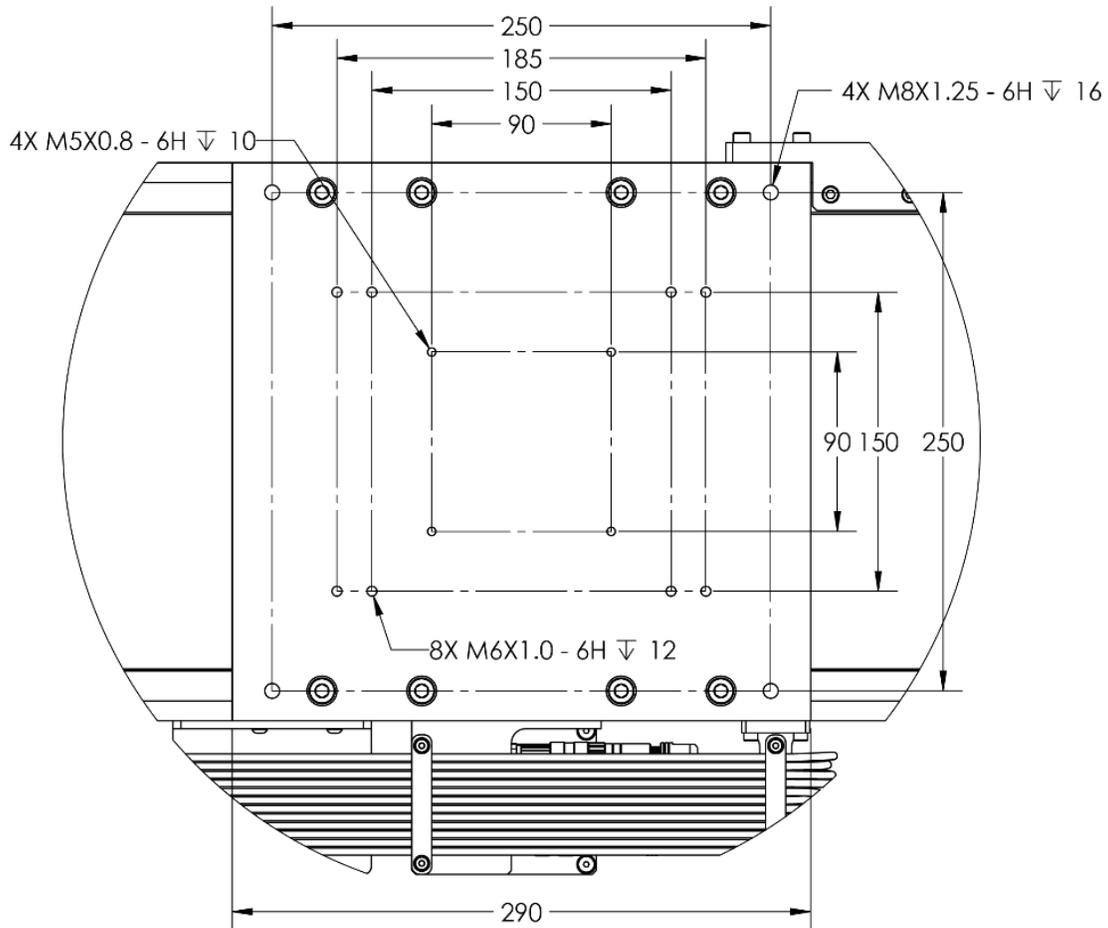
LM9 Tooling Plate and Counterbore Dimensions
